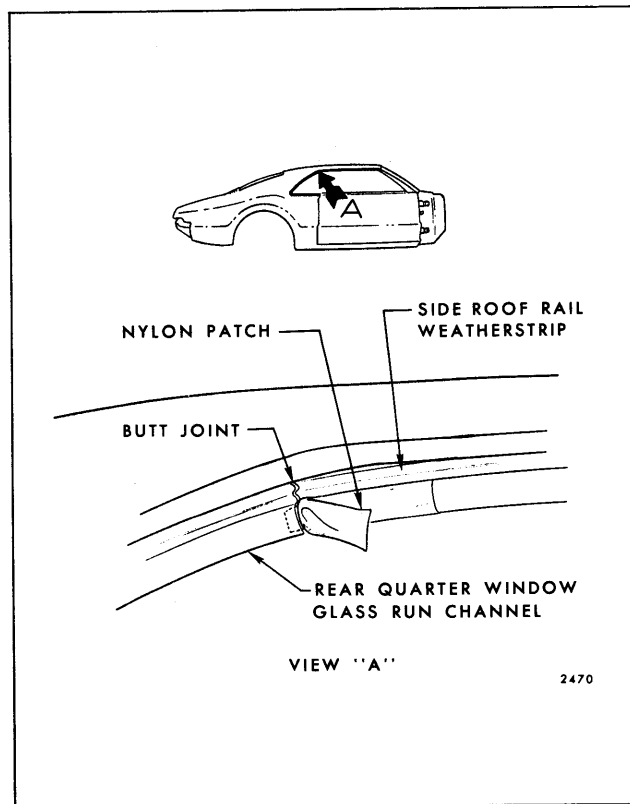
Side Roof Rail Weatherstrip Repair - "E-87" Styles
